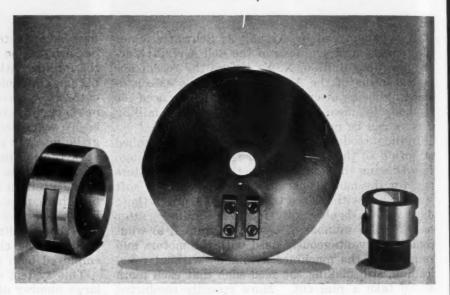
Cam-plate in Center, and Parts Ground by Fixture Described Shown at Right and Left
